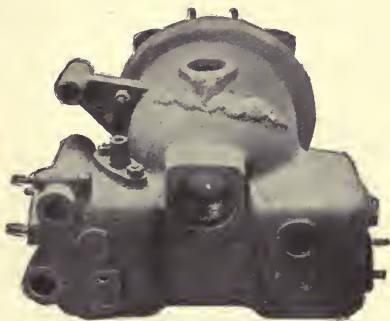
The same cylinder after repair by autogenous welding.
